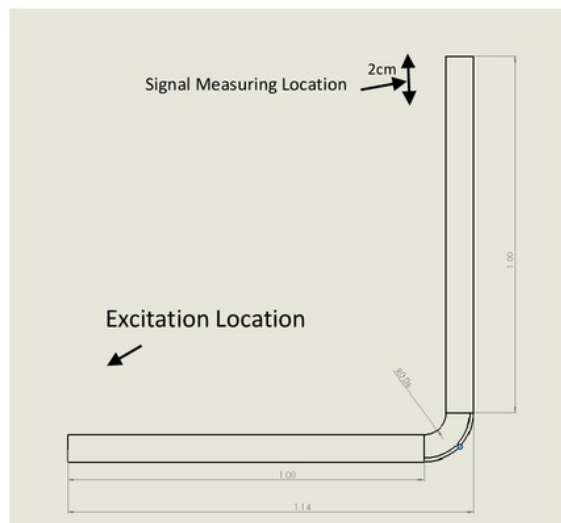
(b) 90 Degree Bend Pipe Dimension
